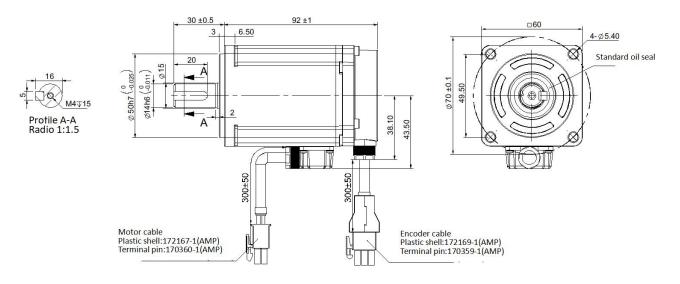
Installation dimension drawing of WD series 60 flange servo motor
